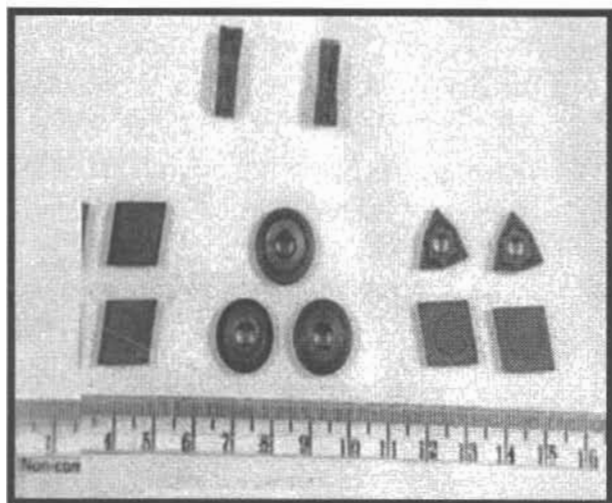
Diamond coated WC-tool bits and molybdenum tube cutter wheels.
